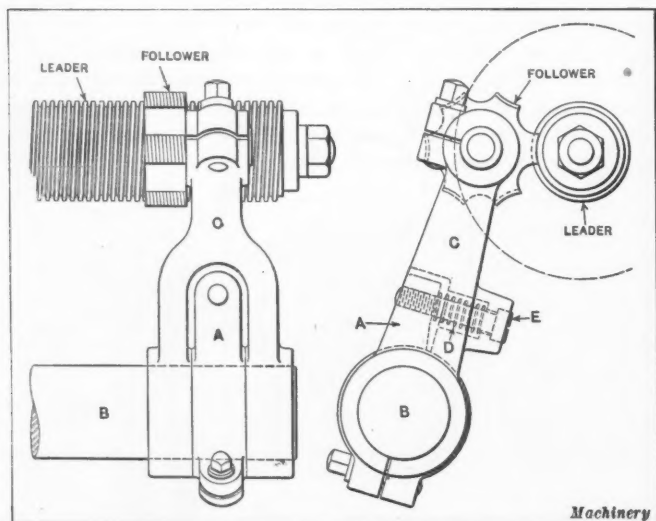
Flexible or Yielding Follower Arm for holding Follower in Contact with Straight Leader when chasing Taper Threads
